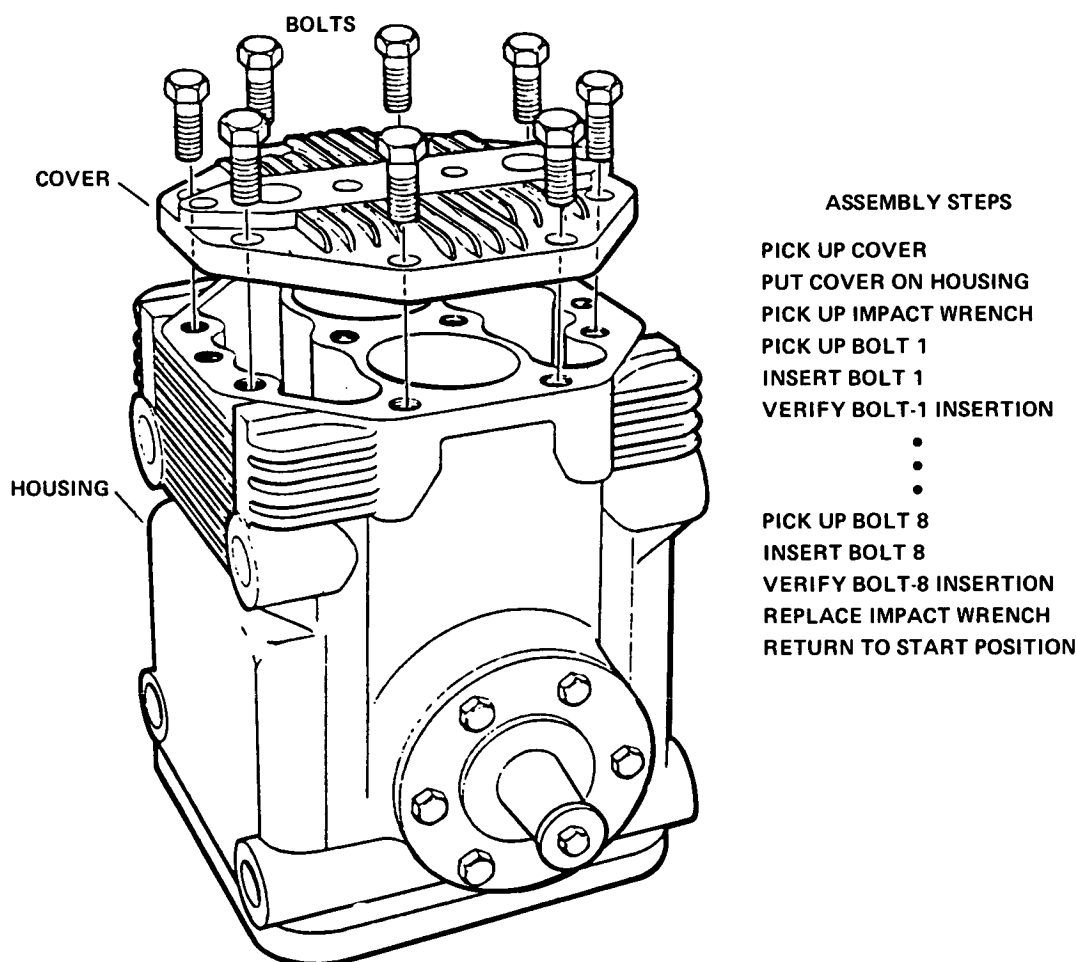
Exploded view of SRI compressor cover assembly. (Rosen et al., 1978.)
